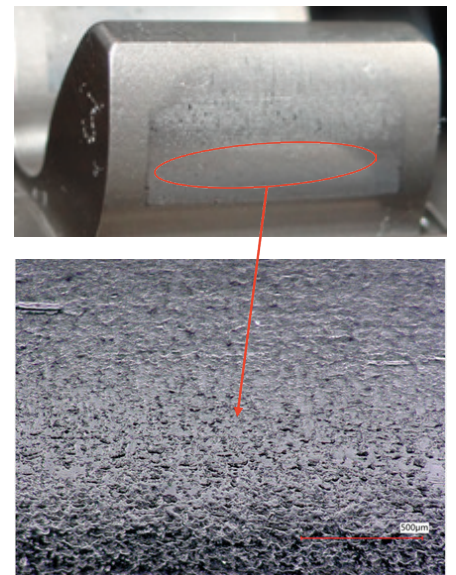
Appearance of micropitting on test gears after 67,500 cycles.
